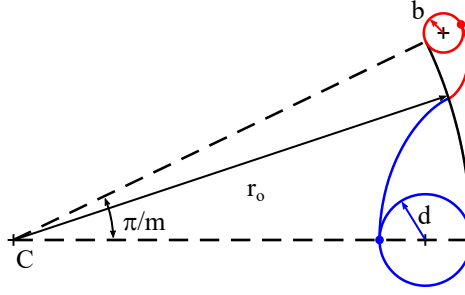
Basic tooth form for the standard cycloidal-toothed outer gear [31]
